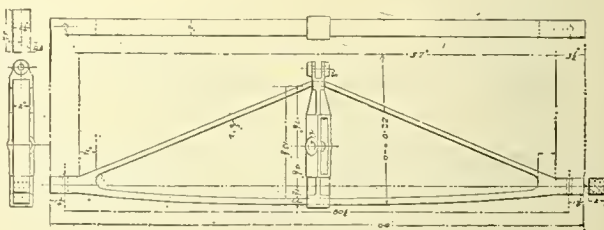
Self-Adjusting Spring Head Beam for Passenger Cars and Locomotive Tender.
